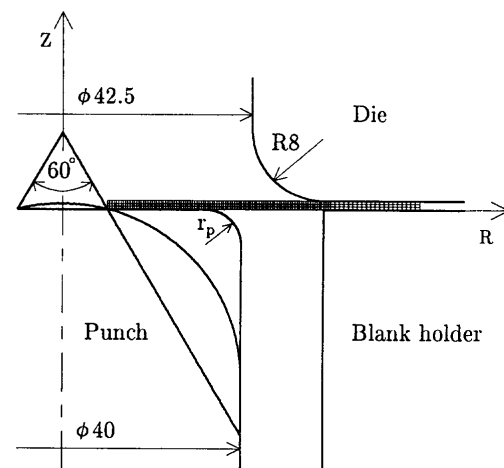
Schematic of bore-expanding test using conical-, hemispherical- and flat-headed punches.
